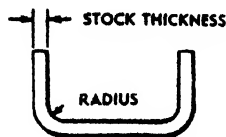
An inside radius equal to stock thickness is commonly the minimum recommended on formed parts.
